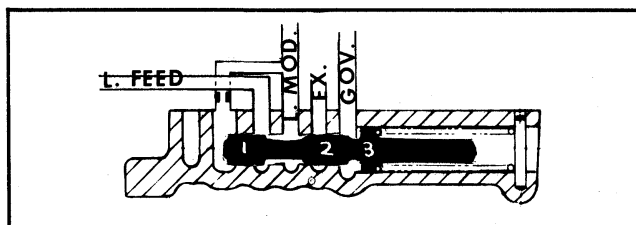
B-18 Modulator Limit Valve - Wide Open Throttle
